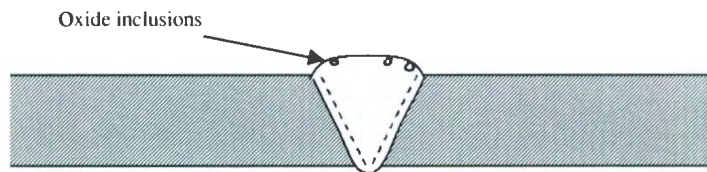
Oxide inclusions in the radiograph of welding joint
